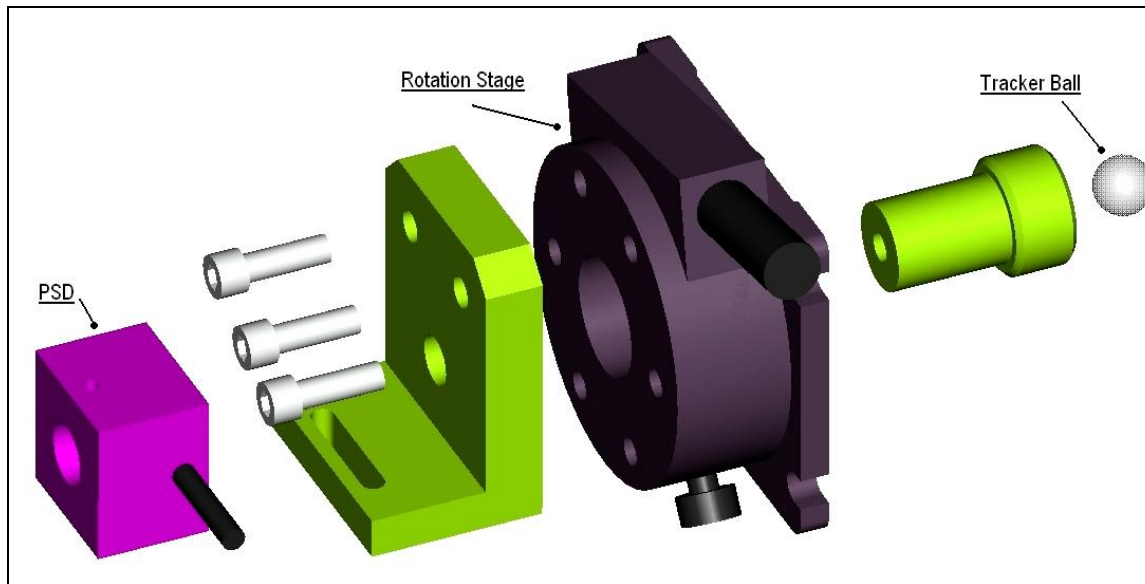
Exploded view of PSD/Tracker Ball mount
